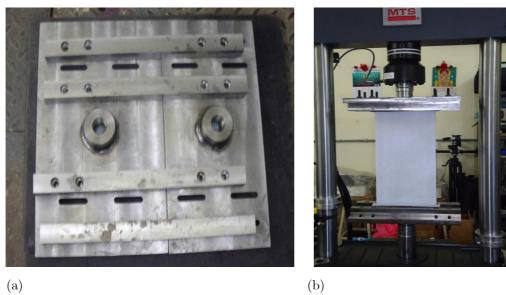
Fabricated fixture: (a) individual elements; (b) assembled fixture
